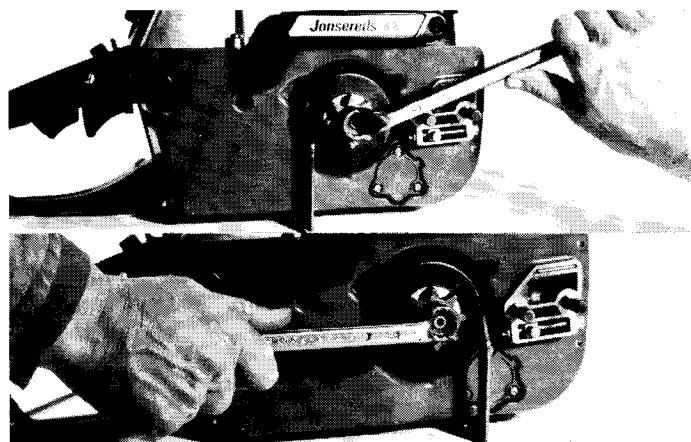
Remove the outer washers, the clutch housing, the bearing, the bushing and the inner protective washer.
